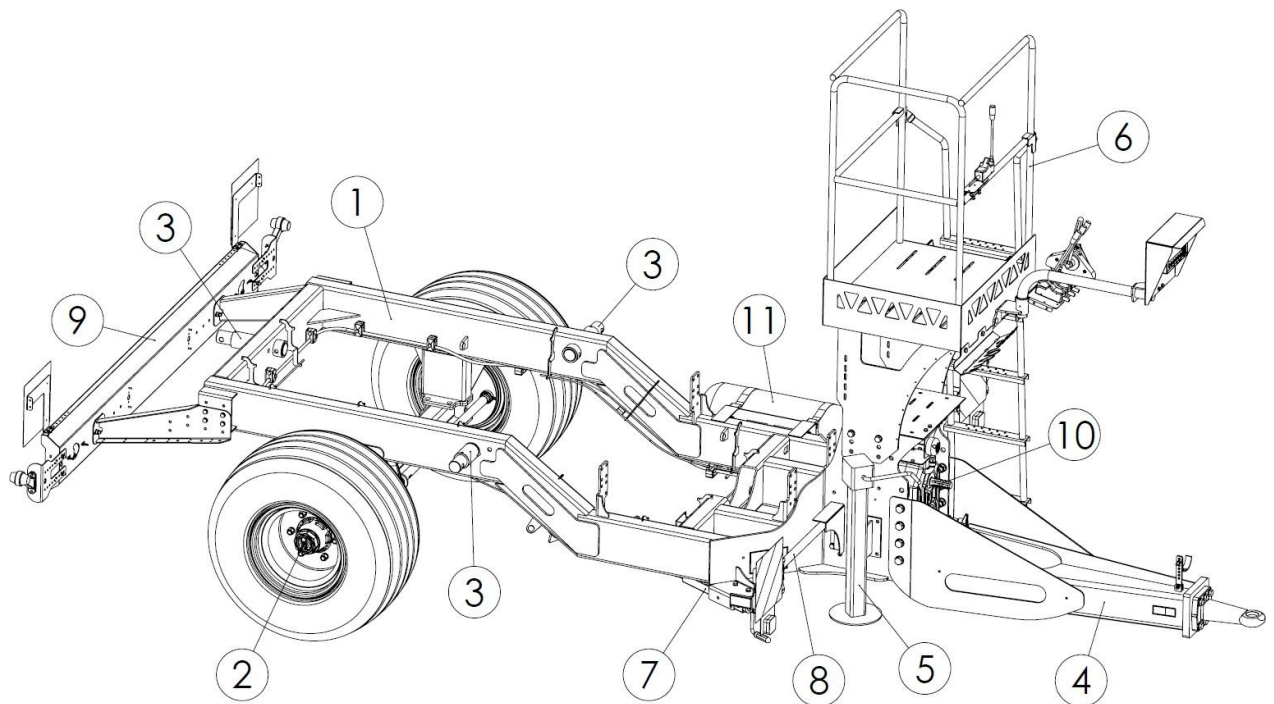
Chassis frame design of a single-rotor wagon: 1 - frame, 2 - axle, 3 - balance tensor, 4 - drawbar, 5 - parking jack, 6 - platform, 7 - parking brake, 8 - front light frame, 9 - light bar, 10 - two-speed gear, 11 - air tank
